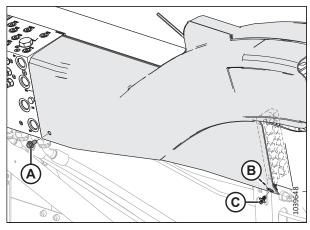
Left Outboard Linkage Cover – View from Rear of Header
